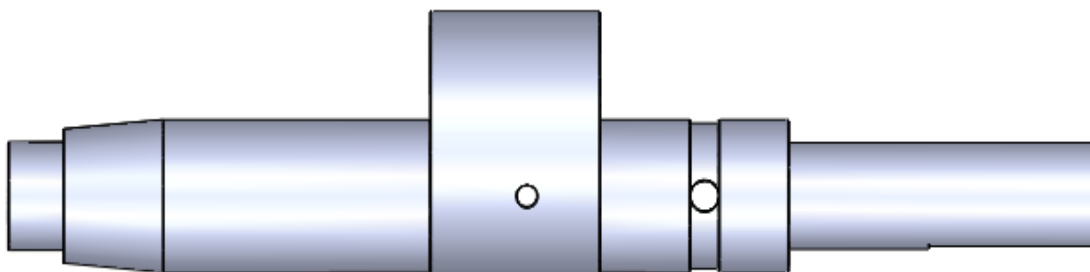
Highlighting the location and size of holes to lubricate the bearing and the gears.
